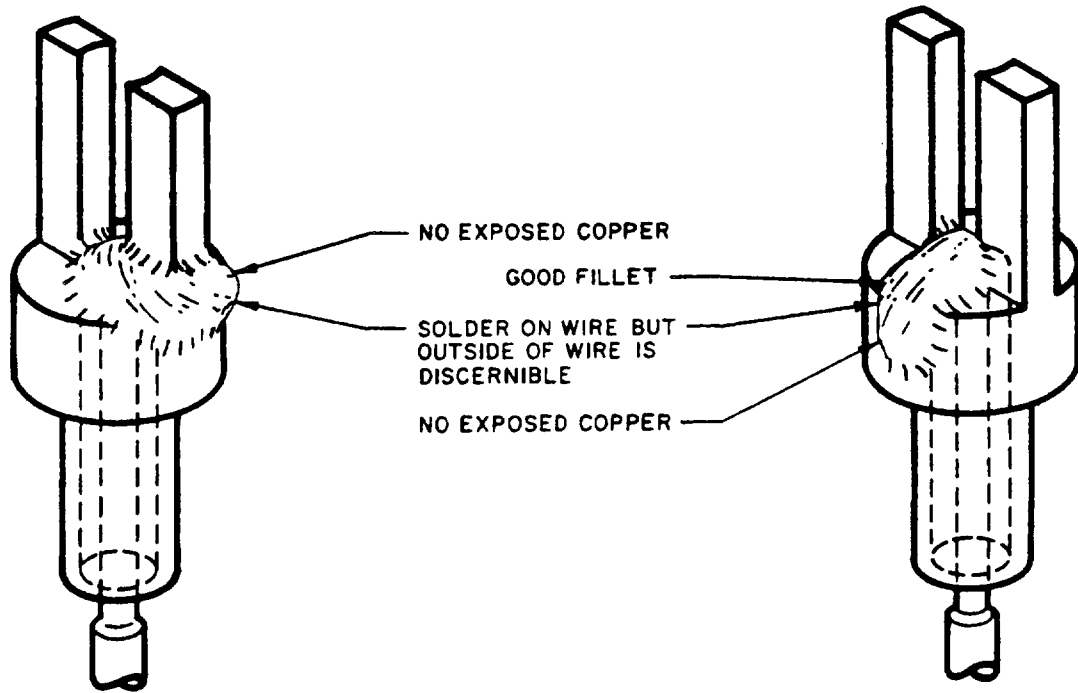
Bifurcated terminal, bottom route solder connection.
